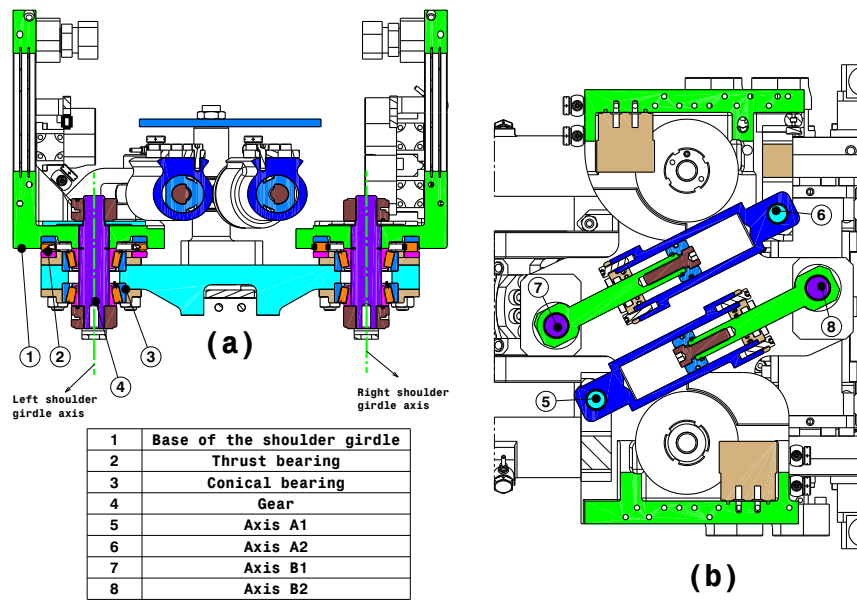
(a): Cross section for the shoulder girdle axis, (b) Cross section for the hydraulic pistons
